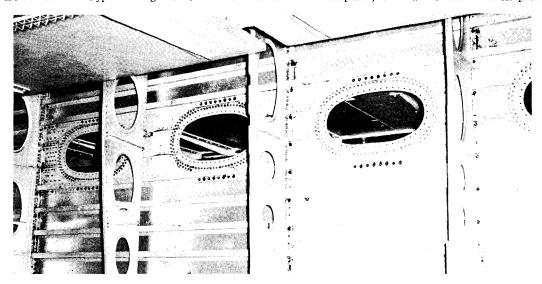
Rib Type Used in Outer Panel-Fuel Tank Section- of Douglas DC-8 Commercial Jet Airliner.
